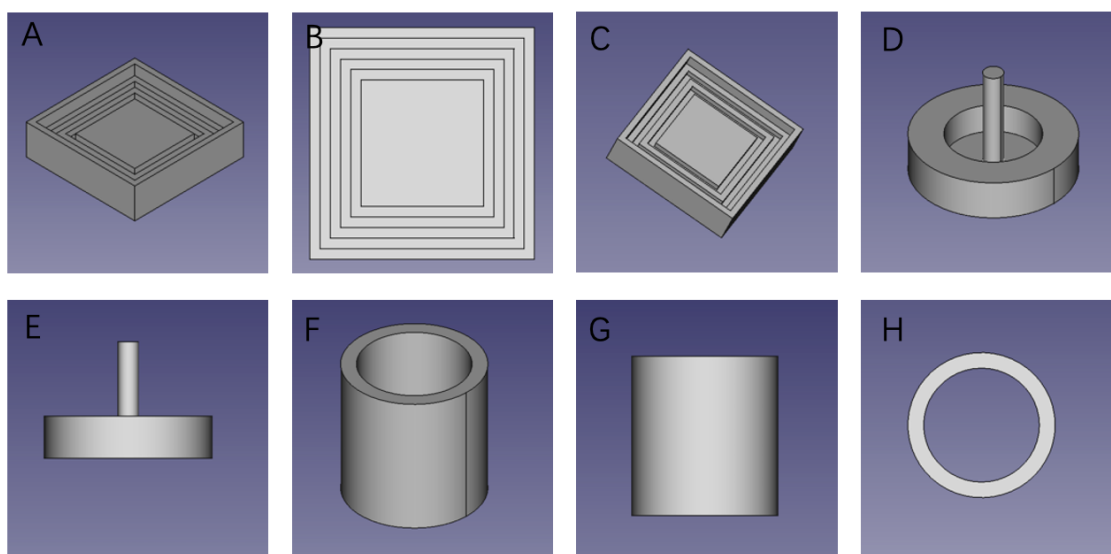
The molds and devices for the silicone cover and the blue silicone ring in different views. Axonometric view, the mold for the silicone cover was 22 mm in length, 22 mm in width and 6 mm in height (A). Top view, the inner diameter of the mold was 20 mm*20 mm. Two positive rectangle circles were designed with 1 mm in length and 1 mm in height to generate two grooves in the silicone cover (B). Axonometric view, the mold for the silicone cover was 22 mm in length, 22 mm in width and 6 mm in height (C). Axonometric view, the bottom device for the blue silicone ring was 16 mm in outer diameter and 9 mm in inner diameter (D). Front view, the diameter of the center cylinder was 2 mm (E). Axonometric view, size of the cylinder was 7 mm in inner diameter and 8 mm in outer diameter (F). Front view of the device for blue silicone ring (G). Top view of the device for blue silicone ring (H).
